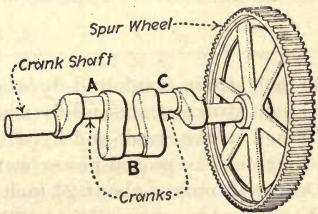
Main Gear And Crank-Shaft Of A Triplex Power Pump.
